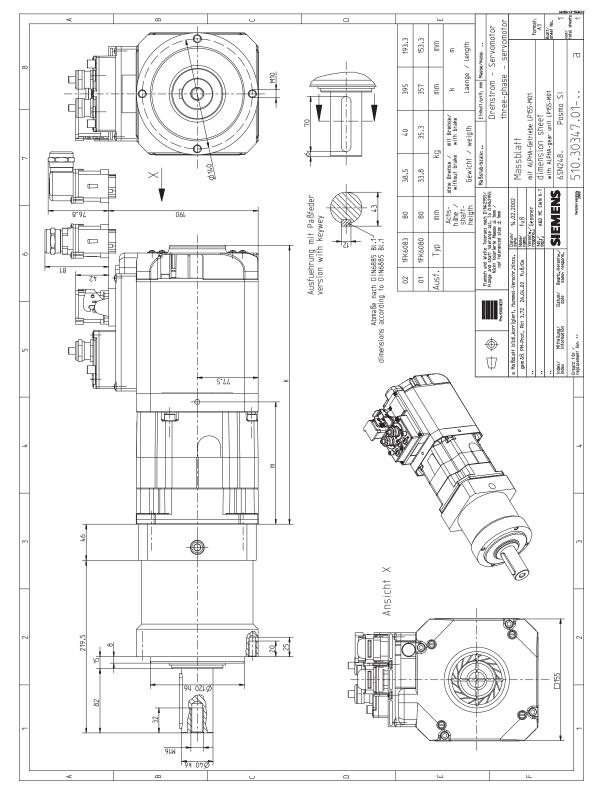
Dimension drawing POSMO SI 6SN248 -2CF00-0G with gearbox LP155-M01
